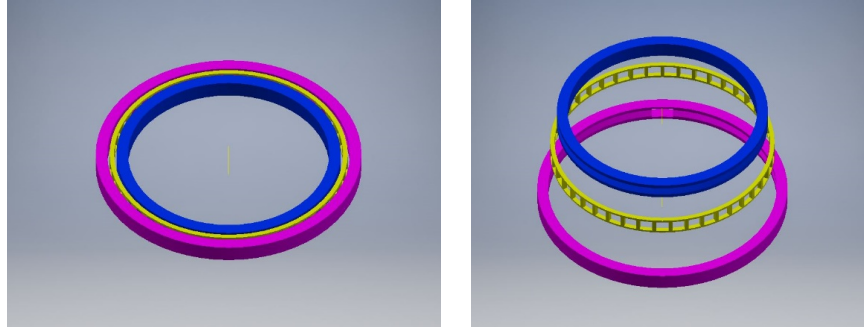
Bearing assembly with bearing keeper and exploded view. The inner race (in blue) is integrated into the outer wedges, and the outer race (in violet) is integrated into the inner wedge. Balls not shown.
